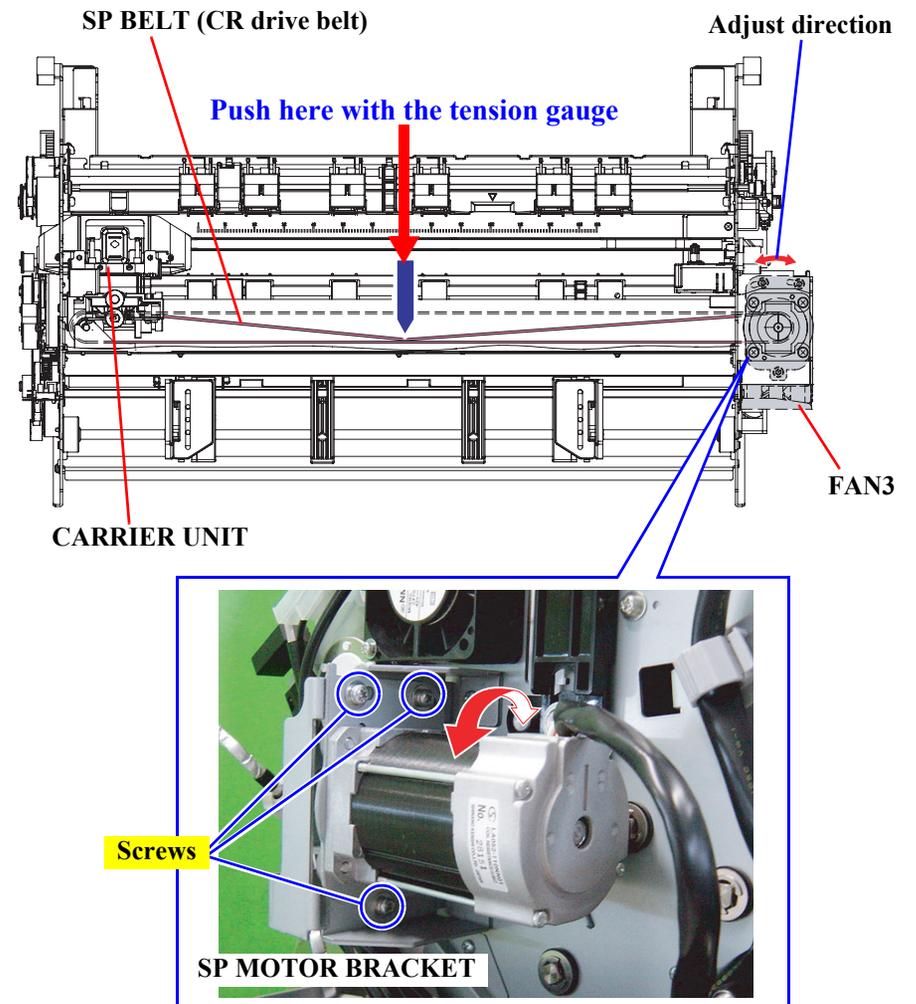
SP BELT (CR Drive Belt) Tension Adjustment
